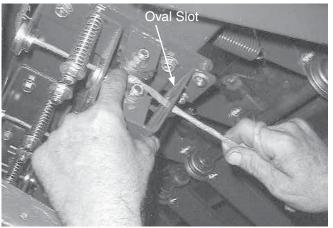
#6 Twine Out Of Tensioner Assembly
